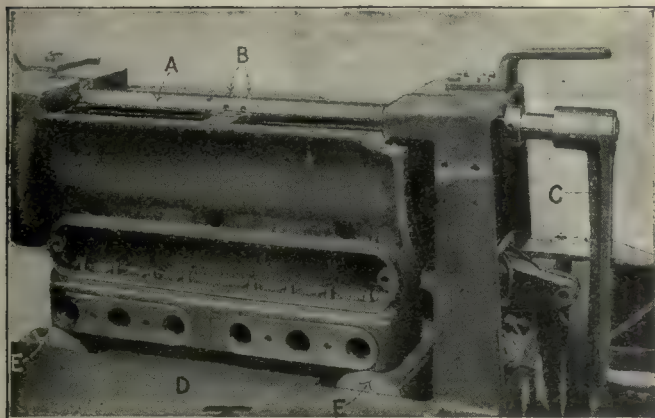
CUTTING THE OIL GROOVES IN BABBITT BEARINGS
